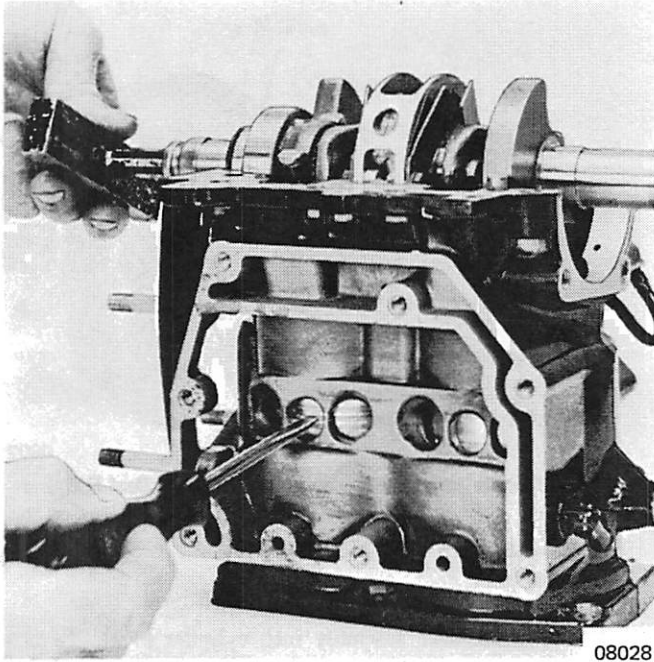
Placing Crankshaft Assembly and Compressors in Cylinder Block
